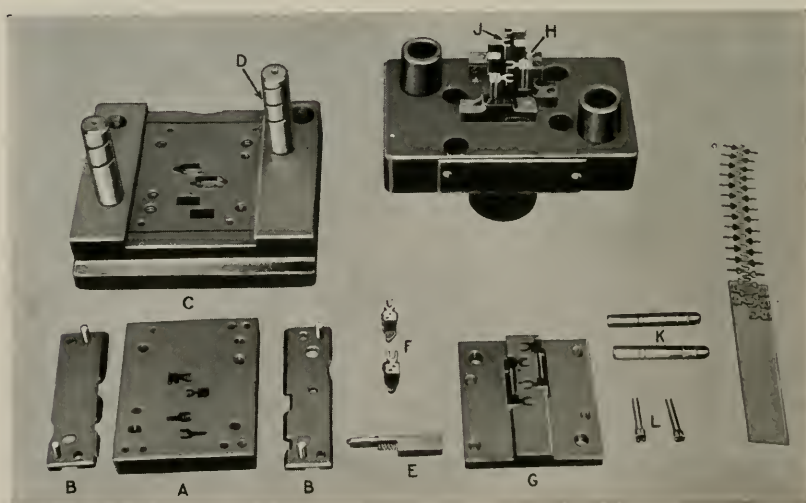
Punch and die for shearing, blanking, and forming solderless cord tip product. When the first tools were built, it was found necessary to develop very accurately the distance between the perforator and
